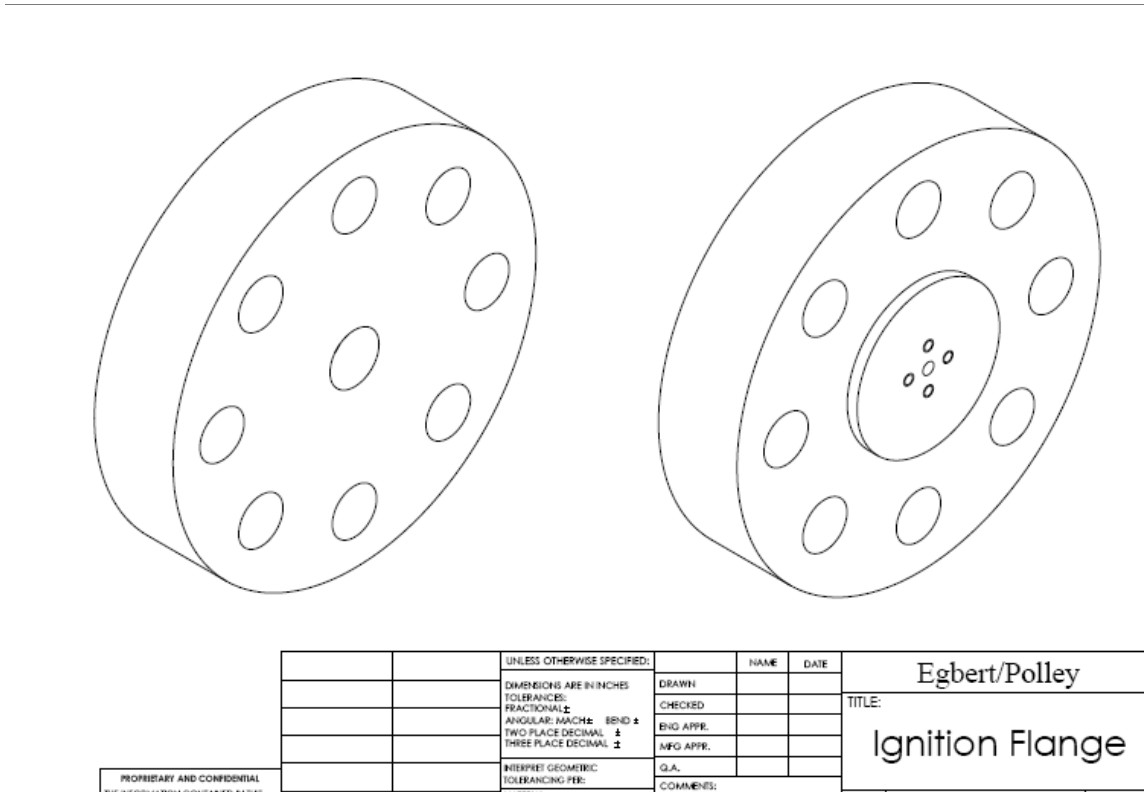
Drawing of ignition flange. The center hole is for glow plug while four outer holes are for rods holding the turbulence-generating obstacles.
